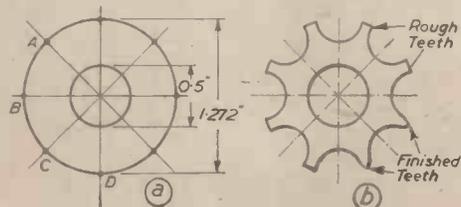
Marking out the small sprocket-wheel, and side view of the finished wheel.
